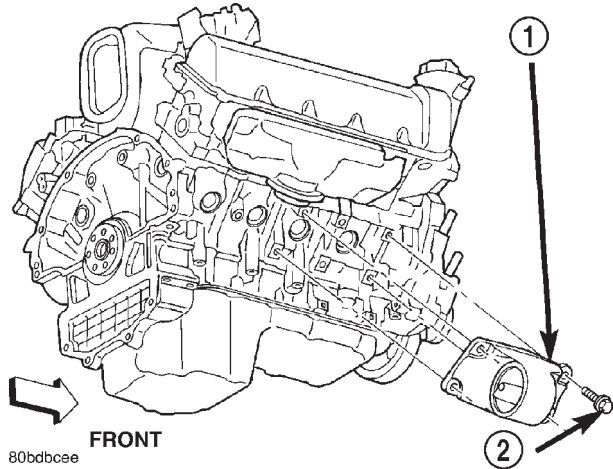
Engine Insulator Mount 4x2 Vehicle—Left Side
